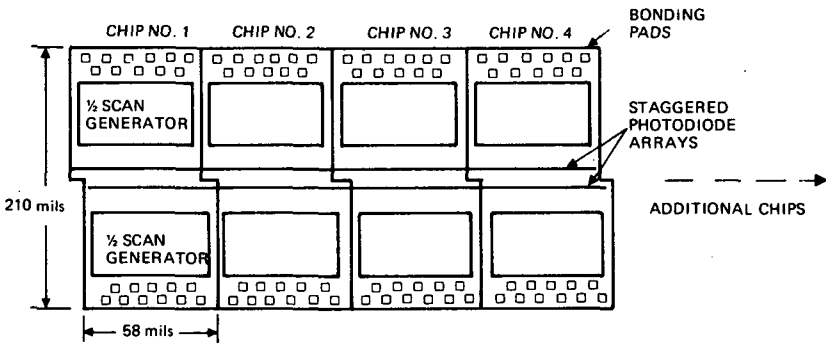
Butted Assembly of Chips with Staggered Photodiode Arrays
